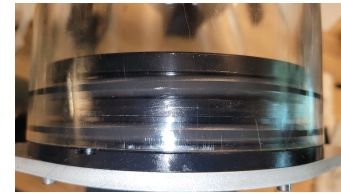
The 3/16" Neoprene O-ring installed into the 8" Blue Robotics Flange
